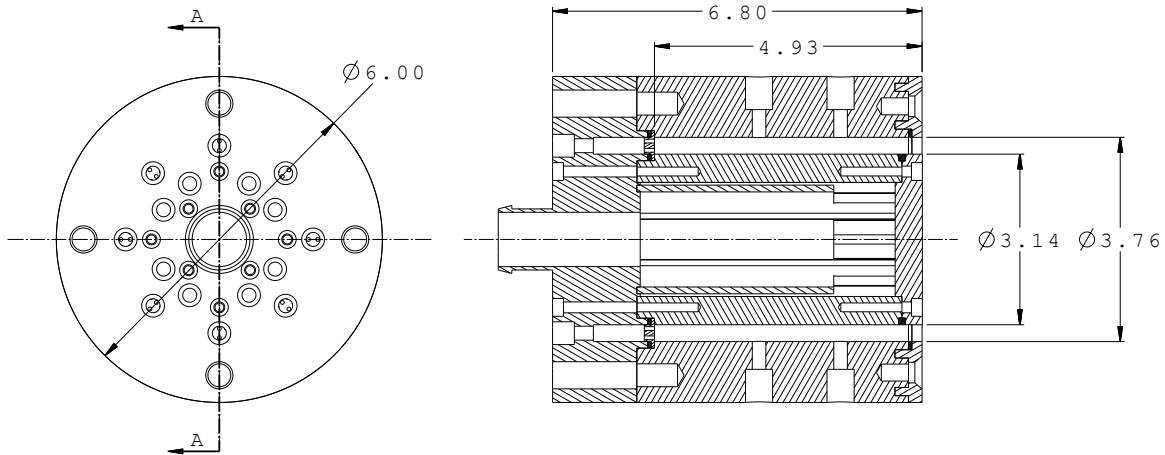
Front and section views of Arthur engine core (dimensions in inches).
